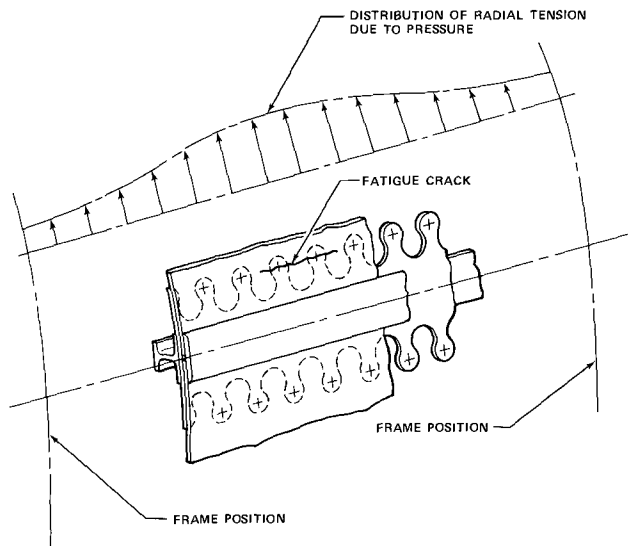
Horizontal splice, fatigue crack location.
